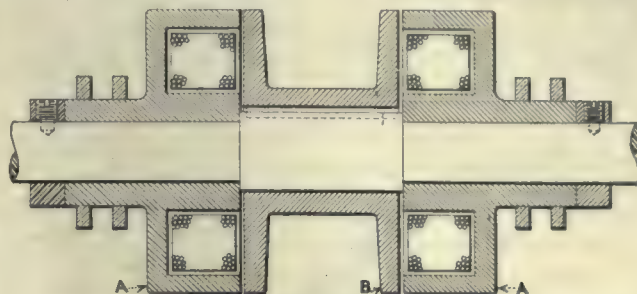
MAGNETIC CLUTCH FOR PLANER DRIVE
